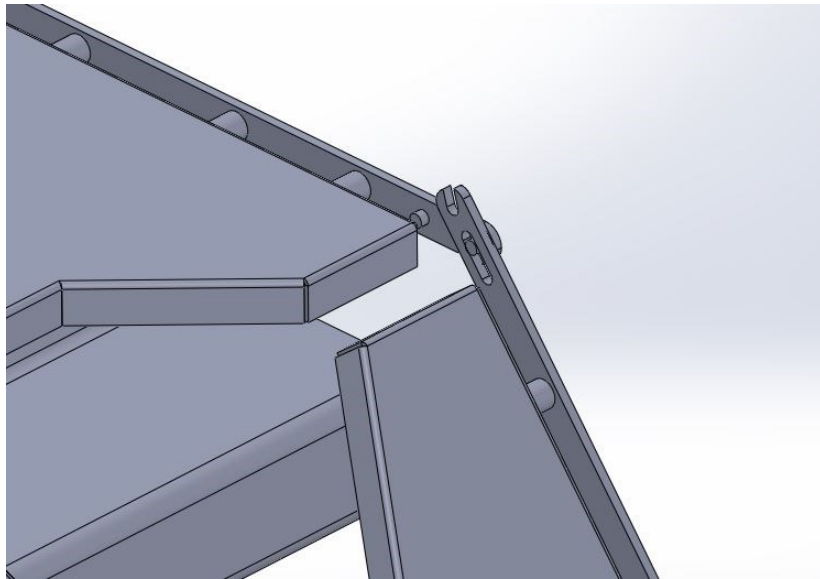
Detailed view of Concept 14 – sliding pin mechanism
